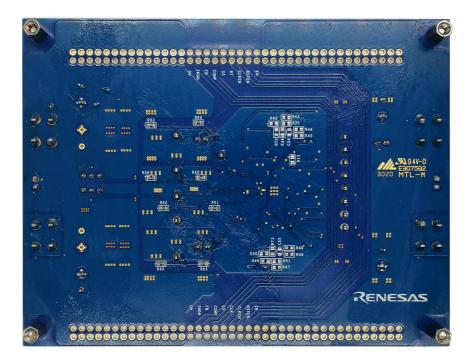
ISL81805EVAL1Z Evaluation Board, Bottom View
